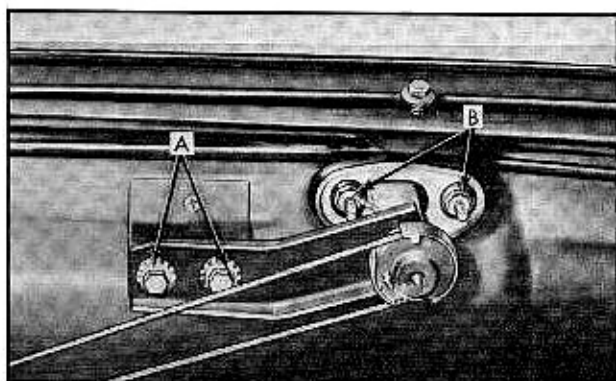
Removal of Windshield Wiper Transmission Support
